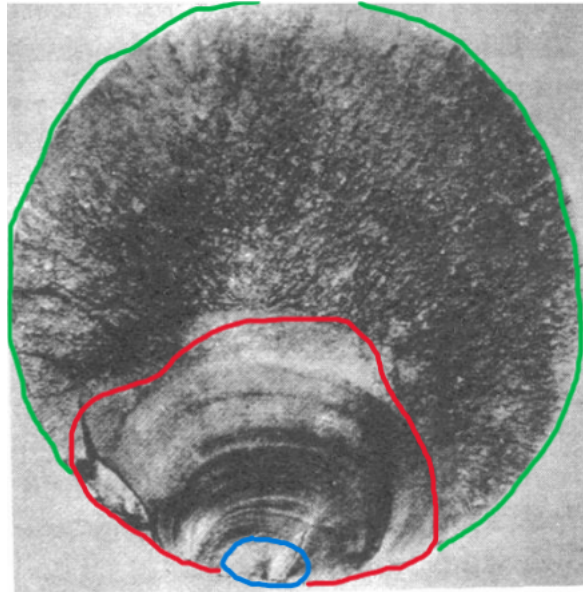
Image of a fracture surface after fatigue cracking
